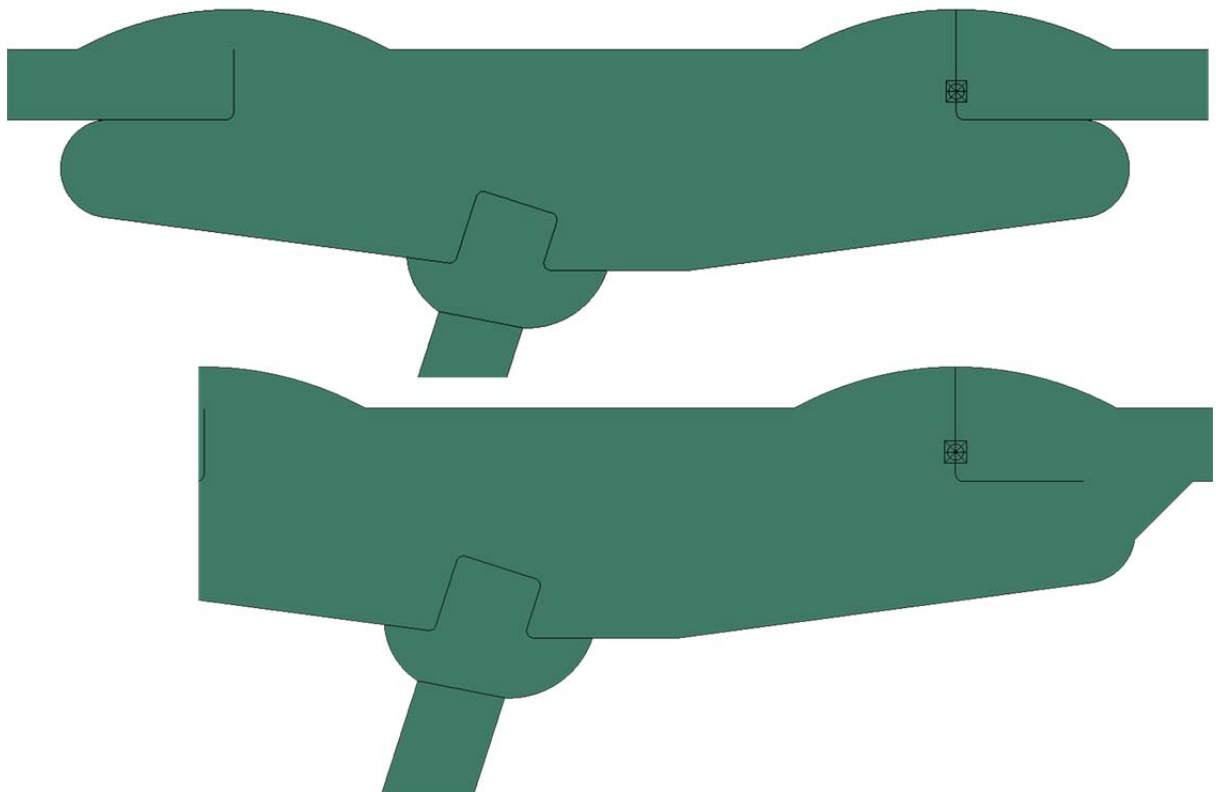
Illustration of the geometry for Case 02 with and without the additional internal fillet weld.
